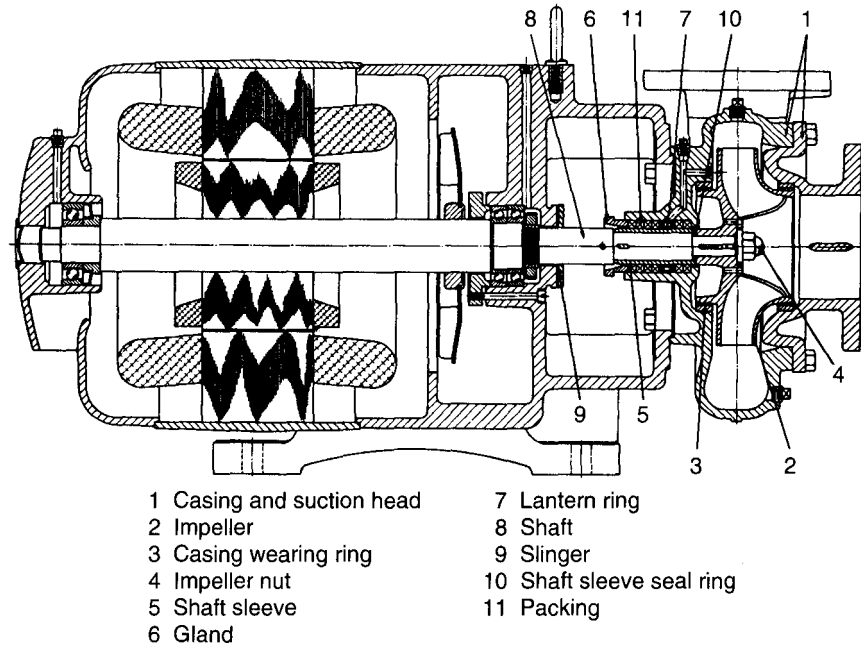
Horizontal close-coupled radially split casing (suction head) centrifugal pump. Courtesy Ingersoll-Dresser Pump Company.
